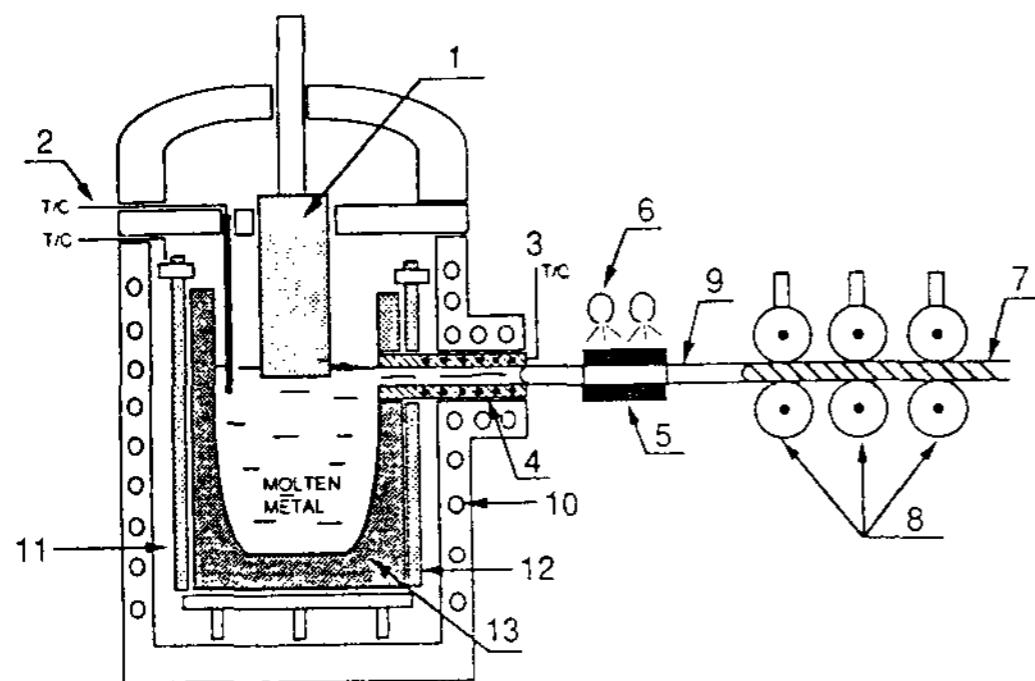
The horizontal continuous casting apparatus with the heated mold.
